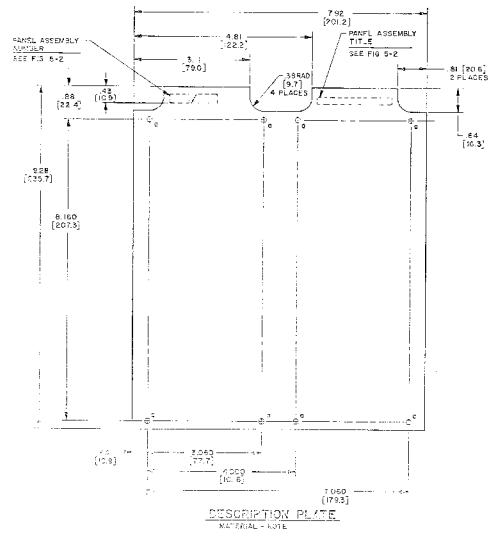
Panel-mounted assembly (sheet 3)
